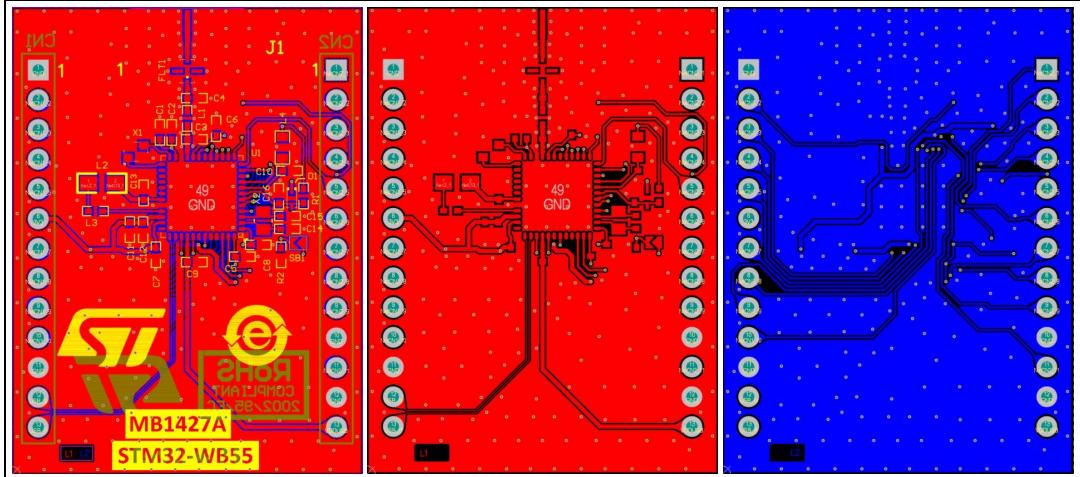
PCB layout for VFQFPN68 (left to right: all, top and bottom layers)
